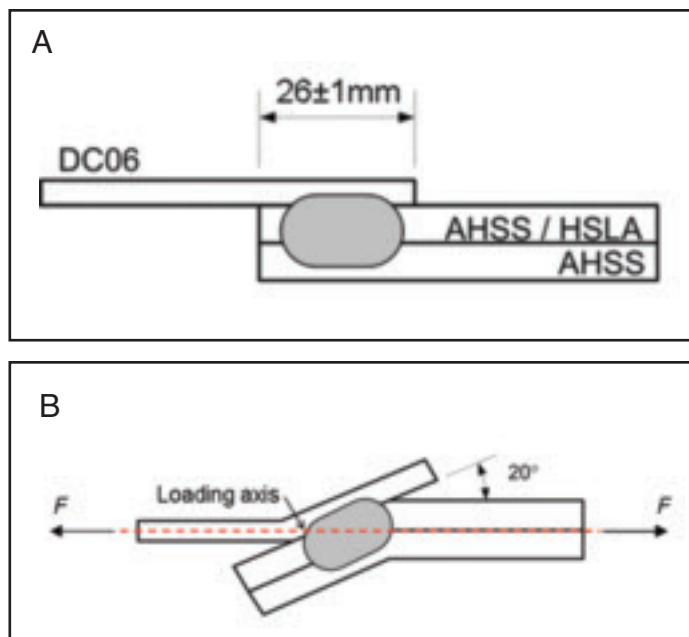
Test specimens' alignment; A — During welding; B — before tension shear testing.
